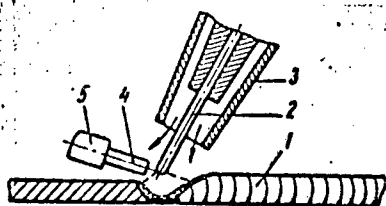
Diagram of automatic argon-arc welding of SAP, end to end, with a gap, with welding wire: 1 -- seam; 2 -- tungsten electrode; 3 -- nozzle; 4 -- welding wire; 5 -- mouth-piece.
